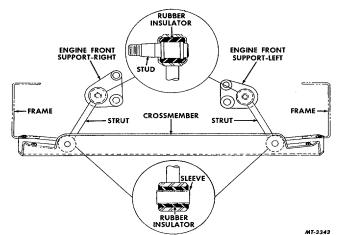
Strut-Type Engine Front Mounting for Chassis with Channel Frame
